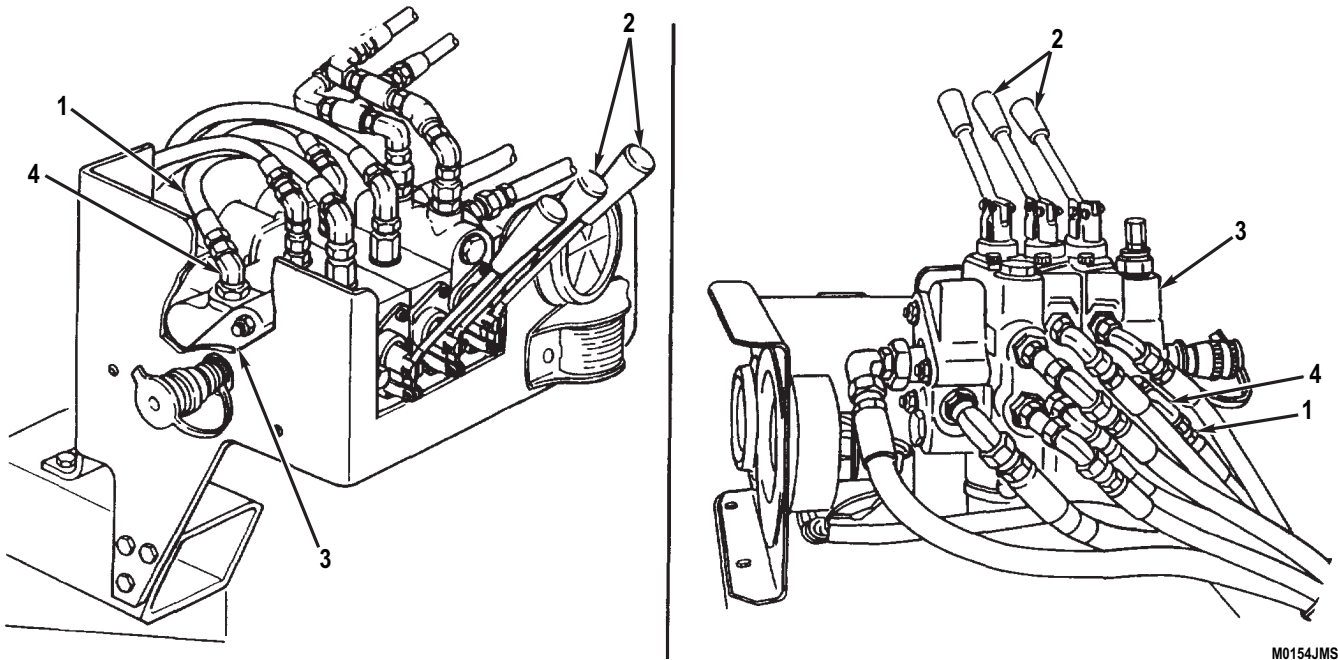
Hydraulic Pump Outlet-to-Hydraulic Control Valve Inlet Hose Removal.
